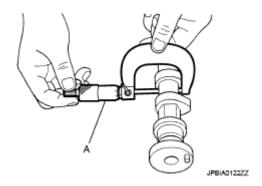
Measuring Outer Diameter Of Camshaft Journal Using Micrometer (EXH) Courtesy of NISSAN MOTOR CO., U.S.A.
